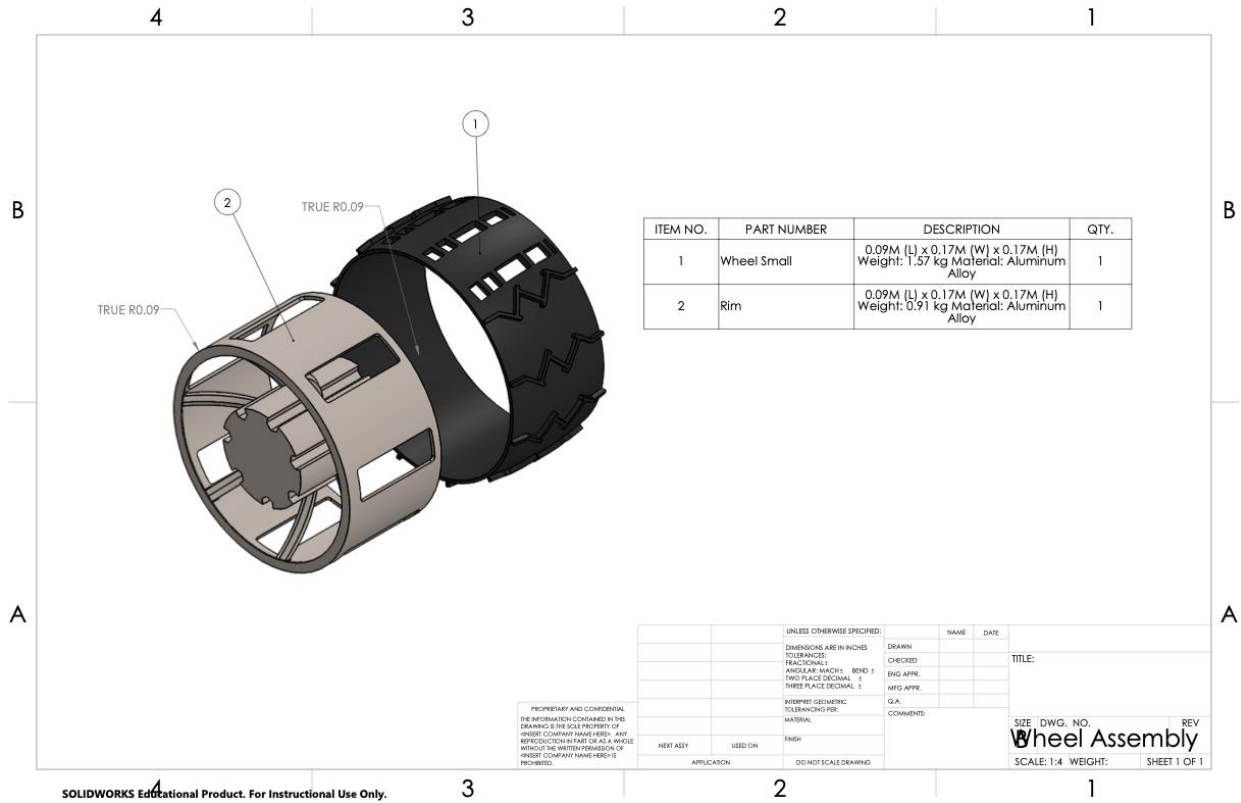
Solidworks CAD 3D model of ARES-42 wheel assembly
